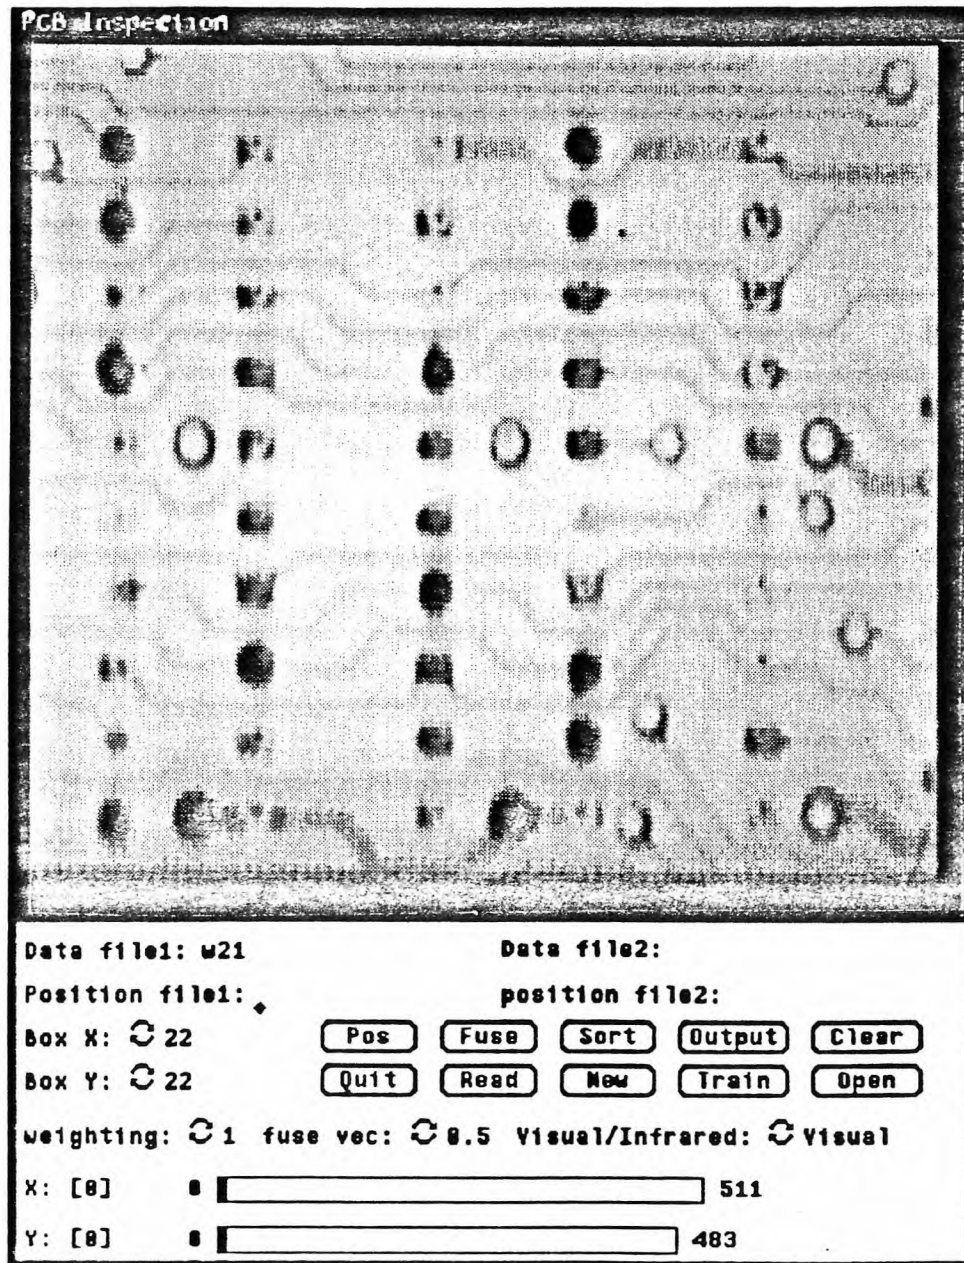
A Window Tool for Solder Joint Inspection
